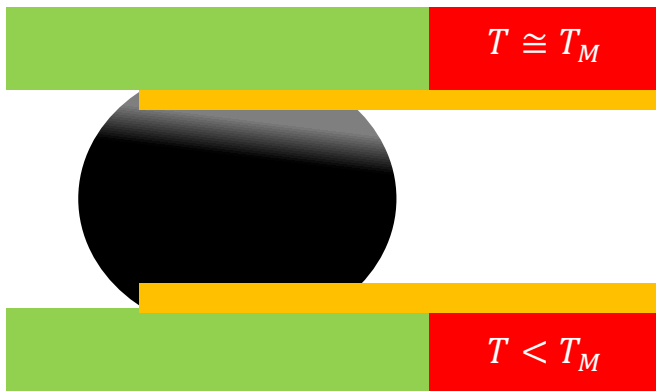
Schematic picture of the directional melting of a BGA solder joint
